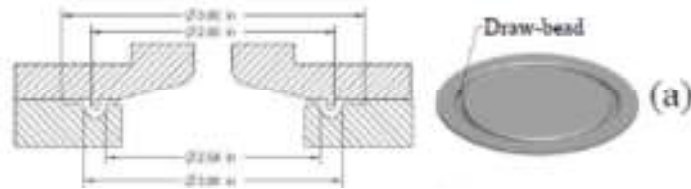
Schematic of clamped columns rods showing draw bead, taken from thesis of Ricardo Vanegas [30]
